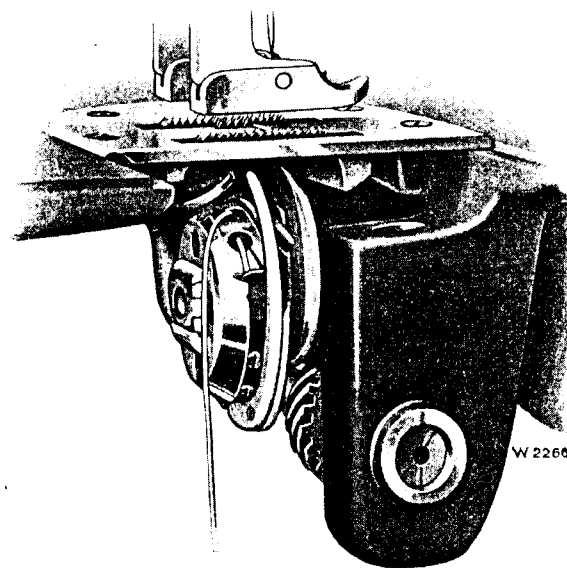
BOBBIN CASE THREADED AND REPLACED
